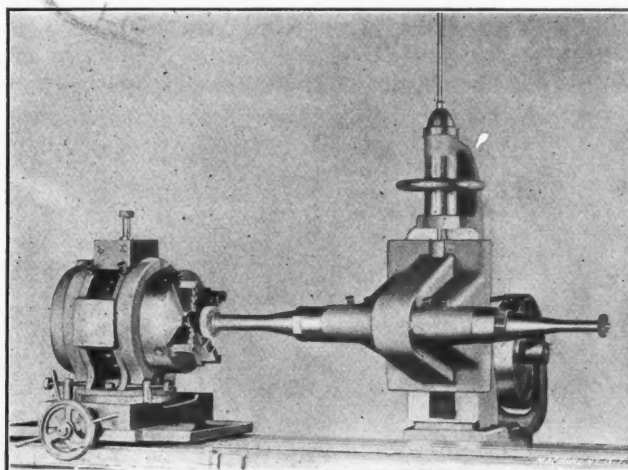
Headstock Reversed for Grinding from Front End of Hole
